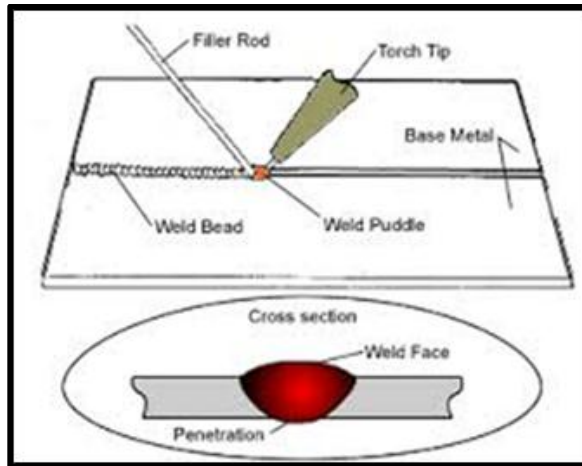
The cross section of weld pool on the parent metal. (Vollertsen, 2003)
